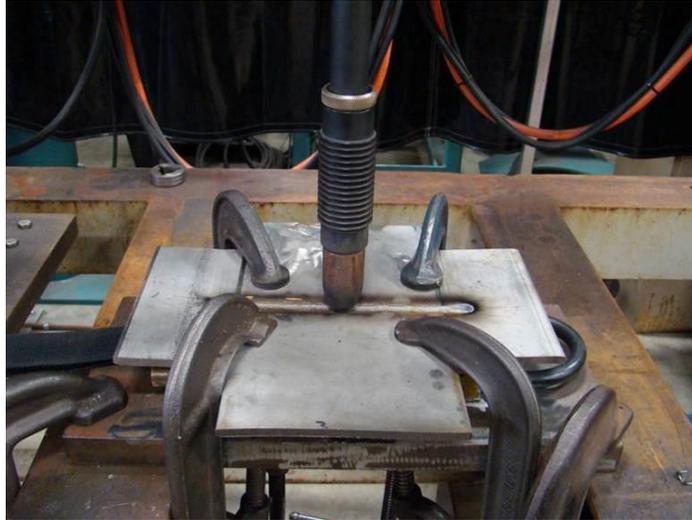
Completed Weld Test Assembly of ERNiCuRu
